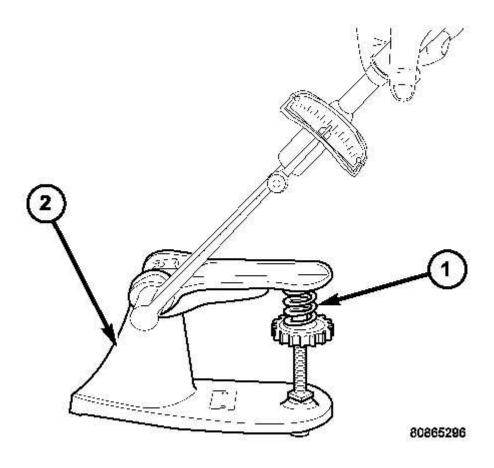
Testing Valve Spring Courtesy of CHRYSLER LLC
